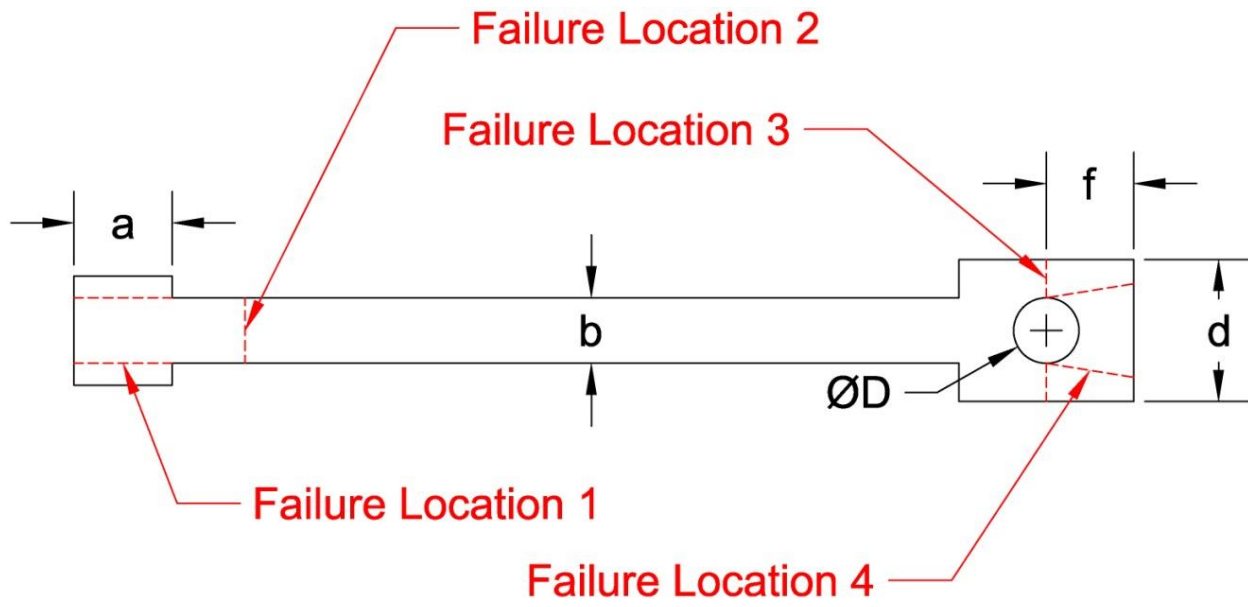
Dimensions and Failure Locations for Bolted Tabbed Bracket
